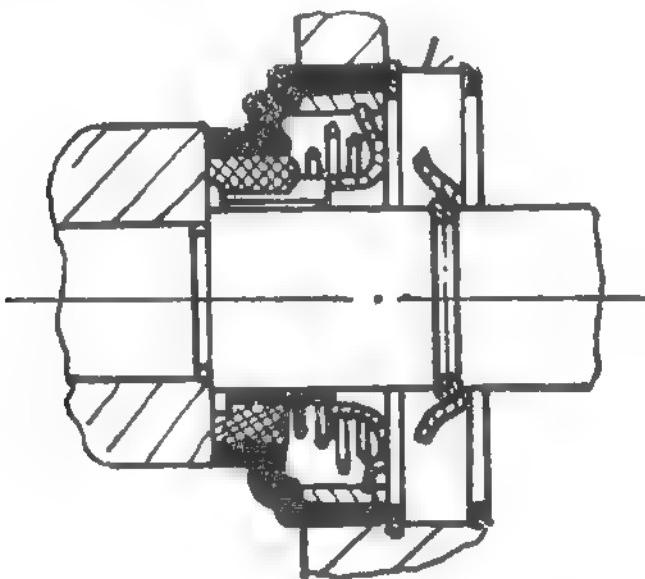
23. WATER PUMP SHAFT SEALING GLAND (VERSION).
